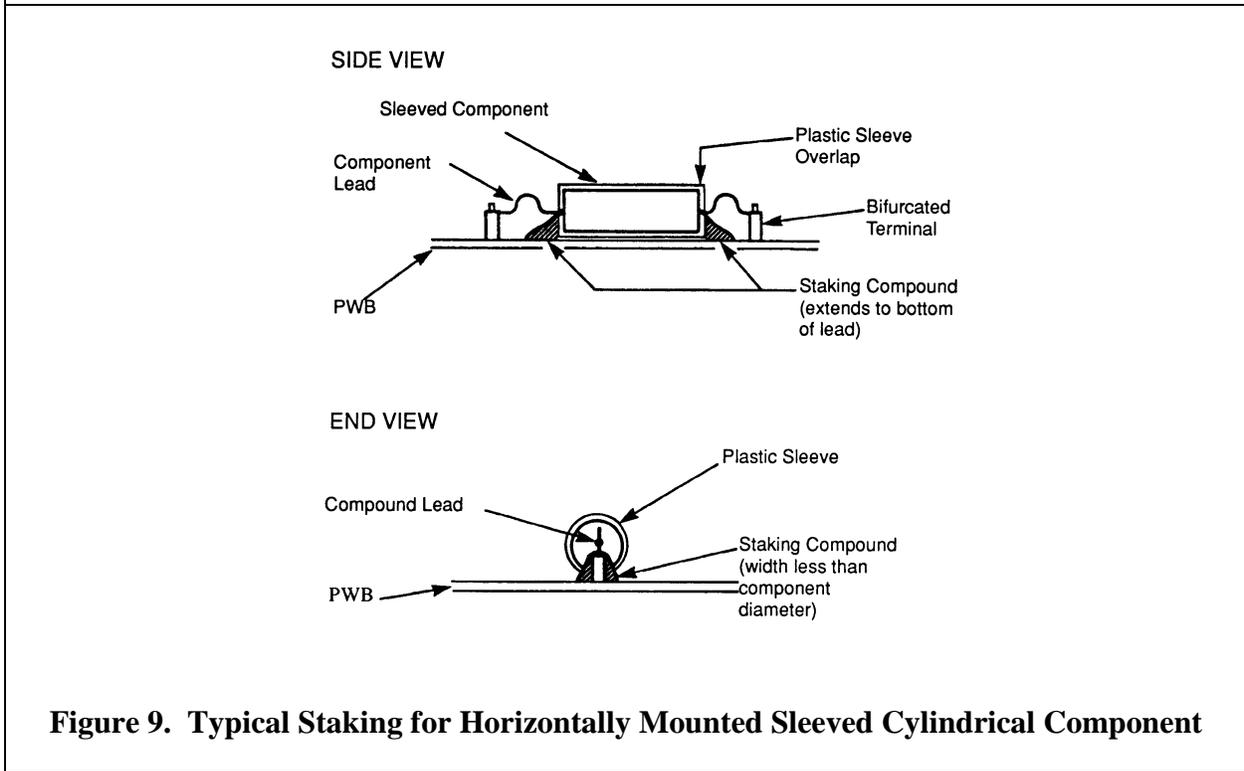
Typical Staking for Horizontally Mounted Sleeved Cylindrical Component
